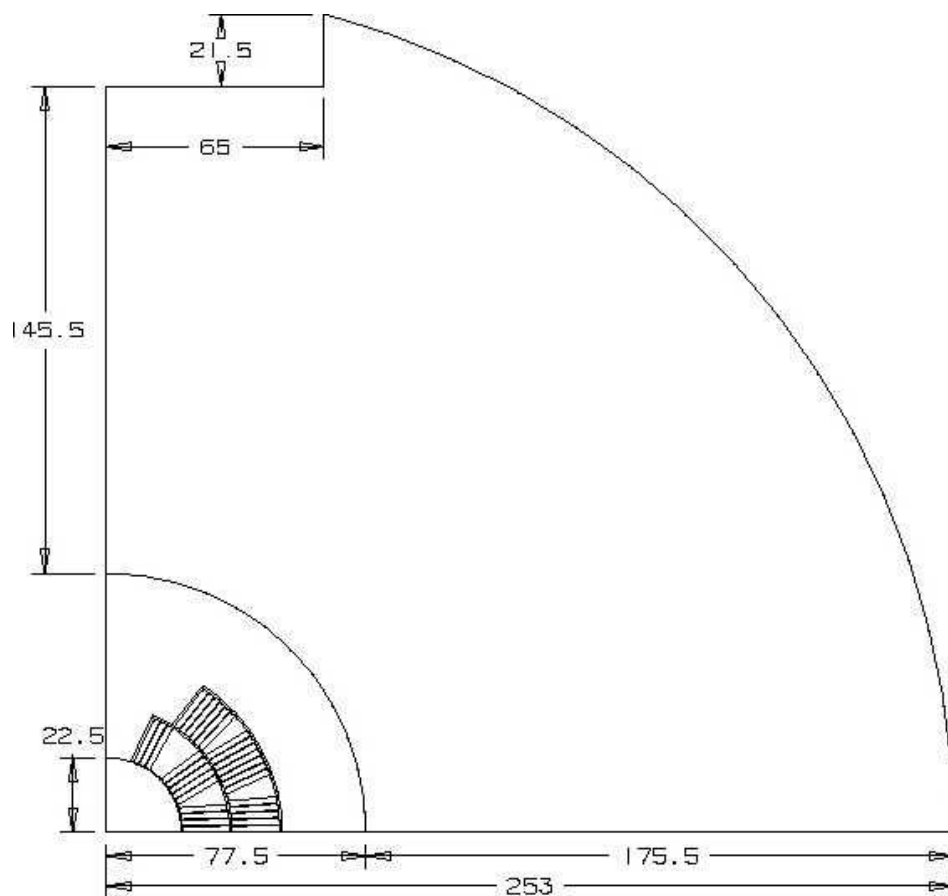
Dimensions of the 45-mm dipole coil and yoke [units in mm].
